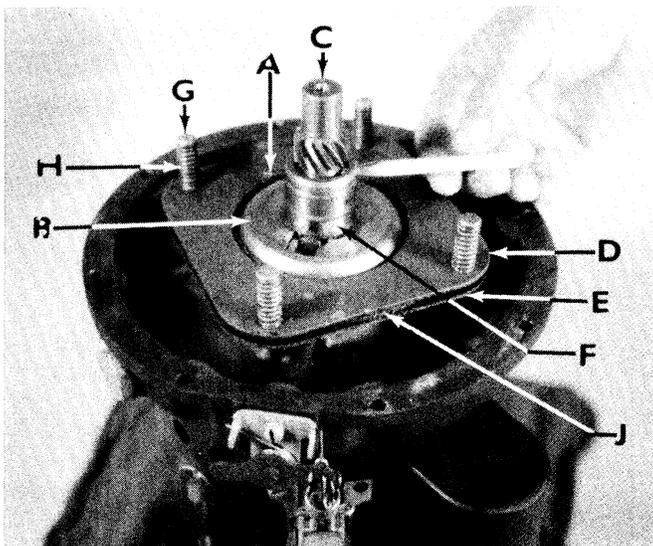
Removing Spin Cage Assembly from Drive Pins
